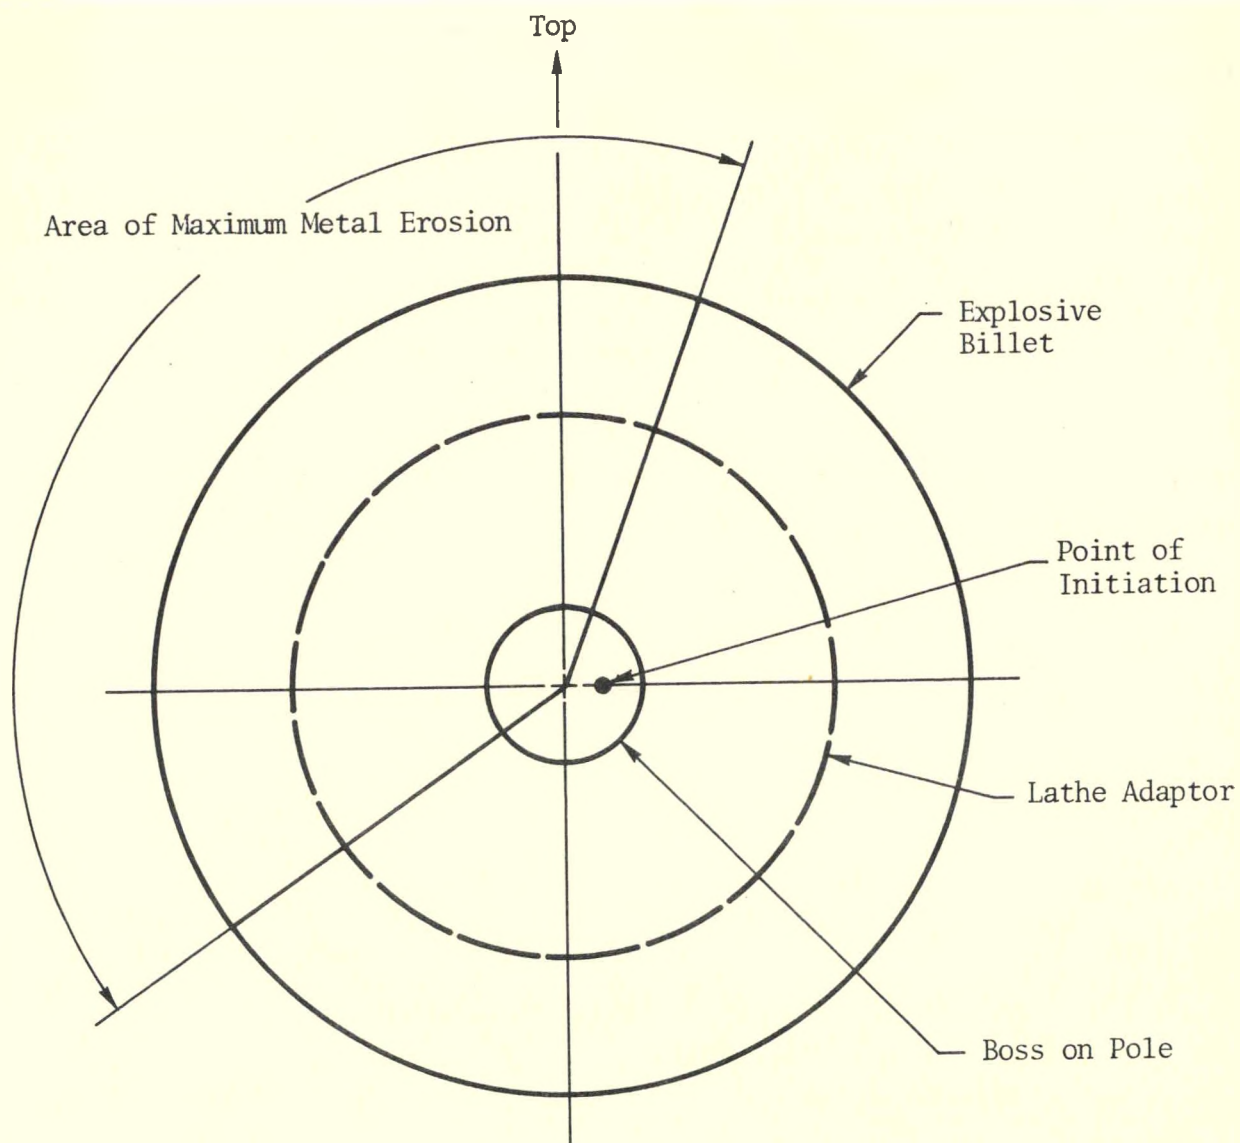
Test No. 4 Lathe Adaptor and Initiation Point
